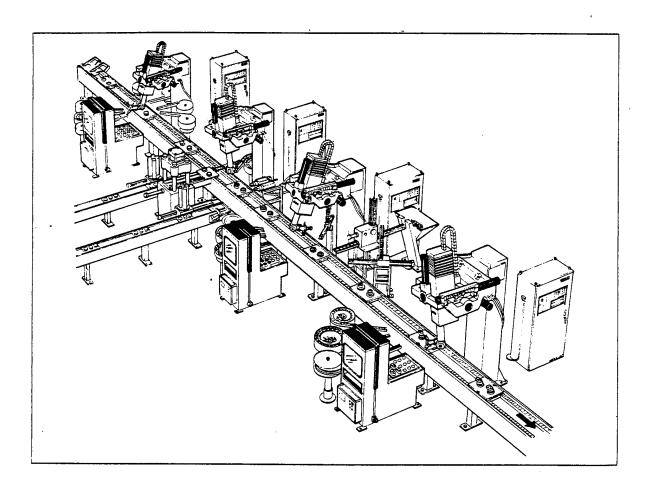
Assembly line with Asea's robots, gripping devices, and storage units in combination with other peripheral equipment, such as vibration and elevator feeders, in a system used to assemble cylinder heads in the automobile industry.
